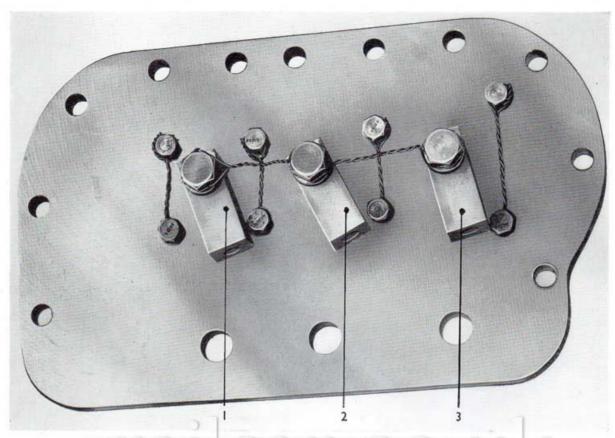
VIEW OF CYLINDER BLOCK PLATE SHOWING LOCATION OF AIR RESTRICTORS.
